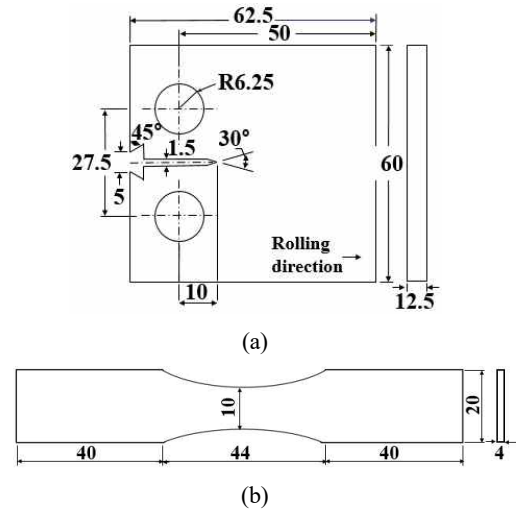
(a) CT specimen, and (b) Smooth specimen for fatigue test (unit : mm)
